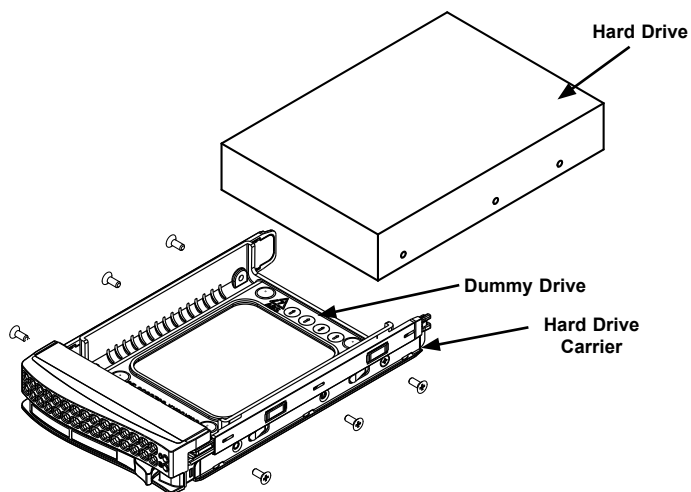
Installing a Hard Drive into Hard Drive Carrier
